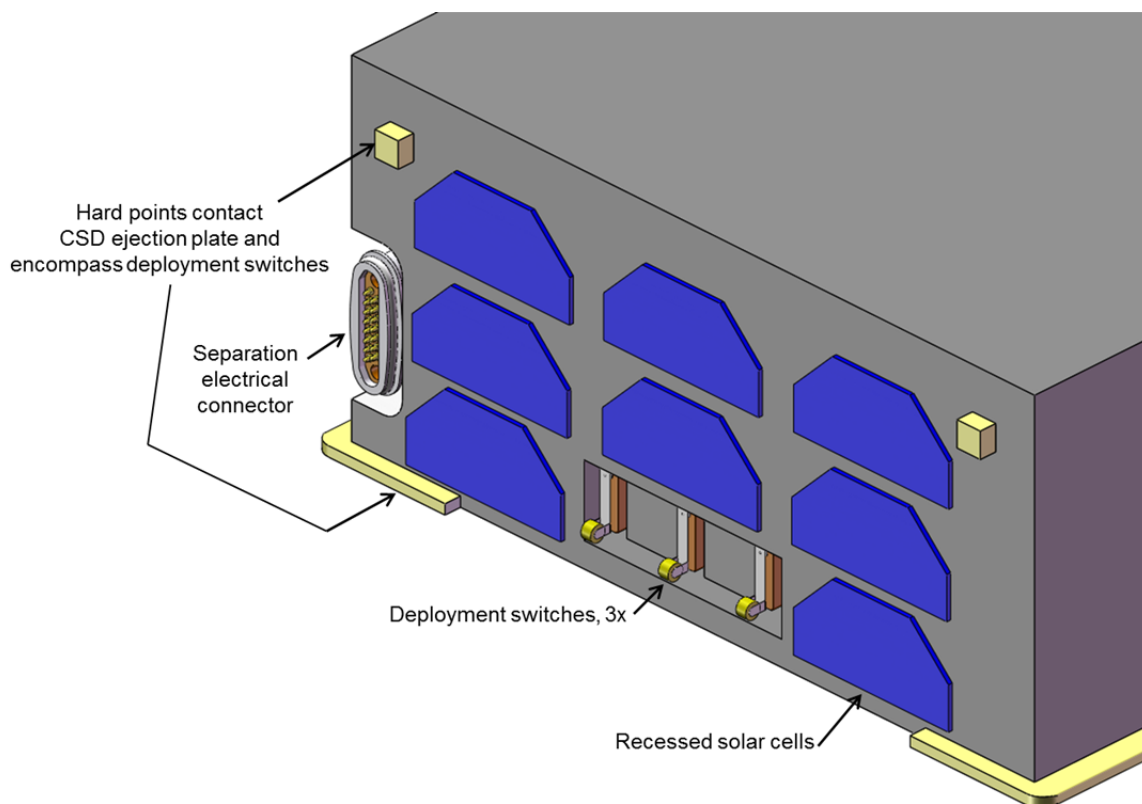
Example of -Z Face that Contacts Dispenser Ejection Plate
